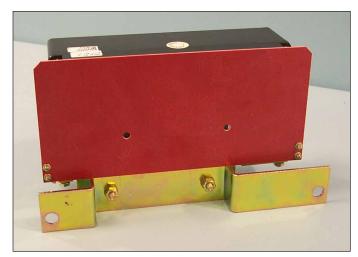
Insulation Barrier Secured to the Mounting Brackets.
